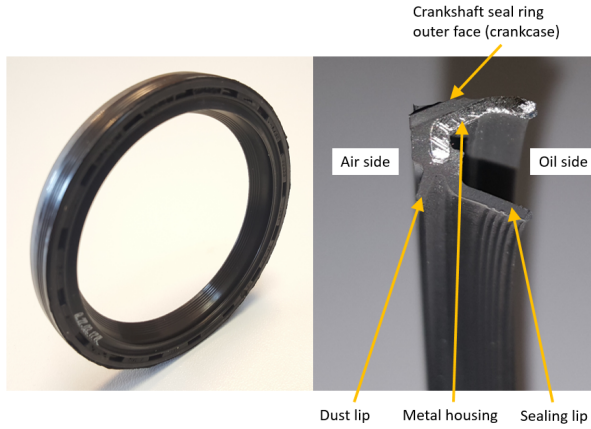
FEAD side crankshaft seal ring: Seal ring (left); Sectional view (right)
